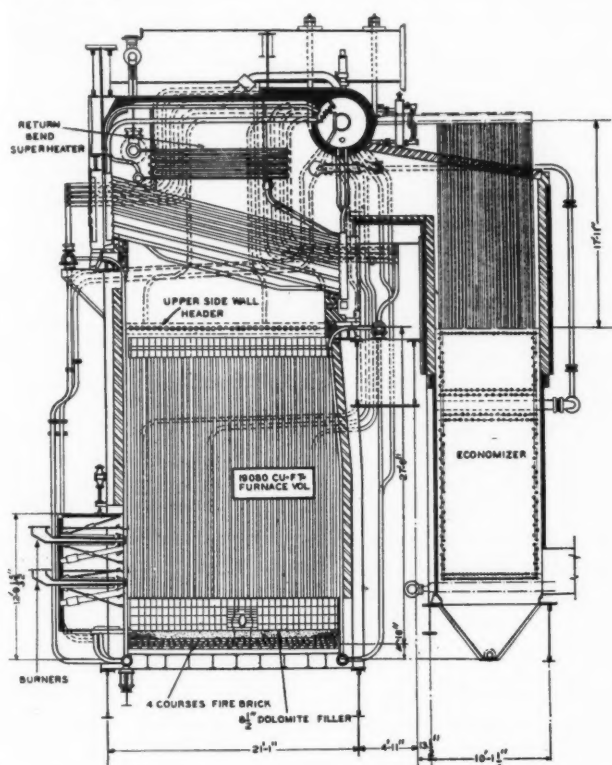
TYPICAL DESIGN OF THE SO-CALLED 1400-LB. STANDARD BOILER UNIT OF THE PRESENT, UTILIZING STEAMING ECONOMIZER AND LIMITED AMOUNT OF BOILER SURFACE; FULL WATER-COOLED FURNACE, UNIT MILL FIRING OF PULVERIZED FUEL THROUGH CROSS-TUBE BURNERS; LIQUID-ASH REMOVAL—1929 INSTALLATION OF THE AMERICAN GAS & ELECTRIC COMPANY AT DEEPWATER, NEW JERSEY
